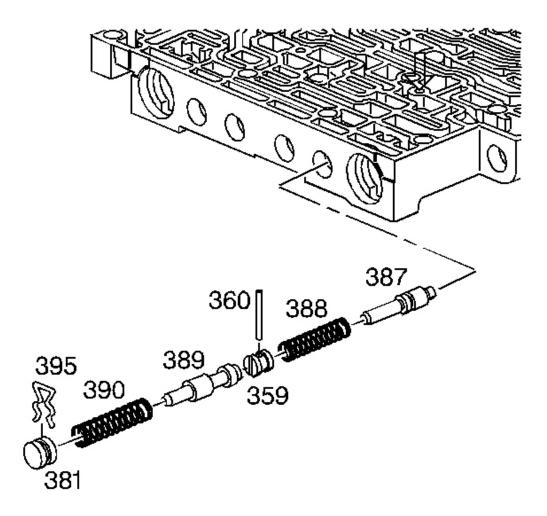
View Of Reverse Abuse Valve & 3-2 Downshift Valve Courtesy of GENERAL MOTORS CORP.
